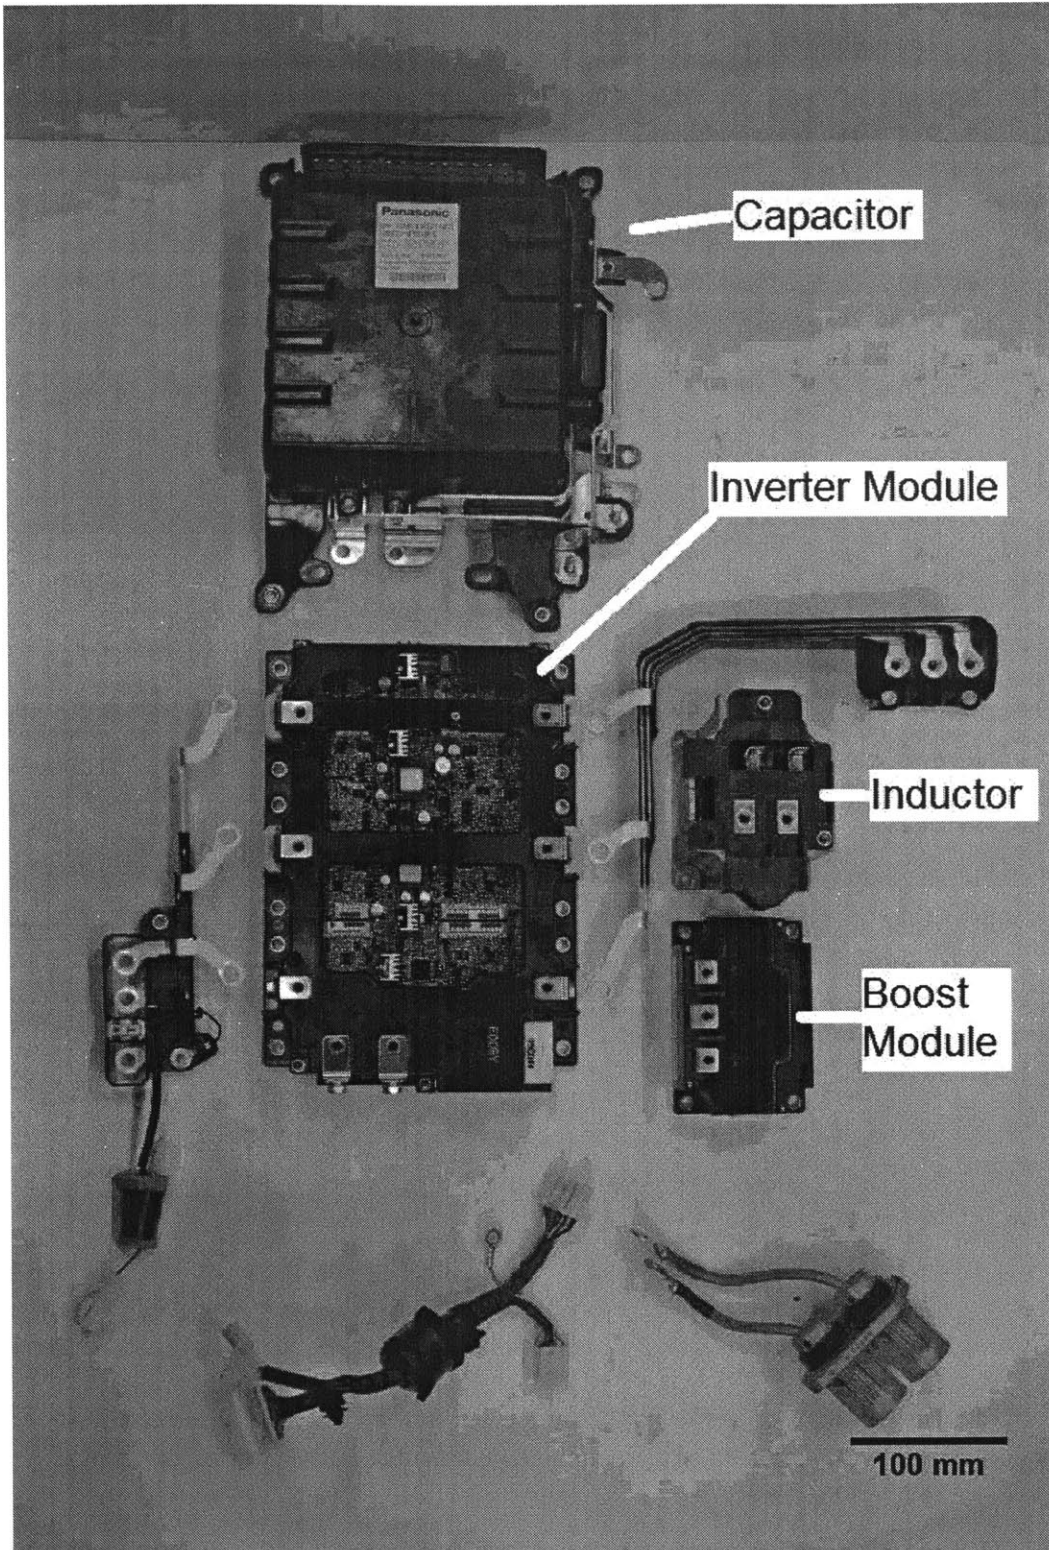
Second generation Toyota Prius inverter assembly with cover removed
